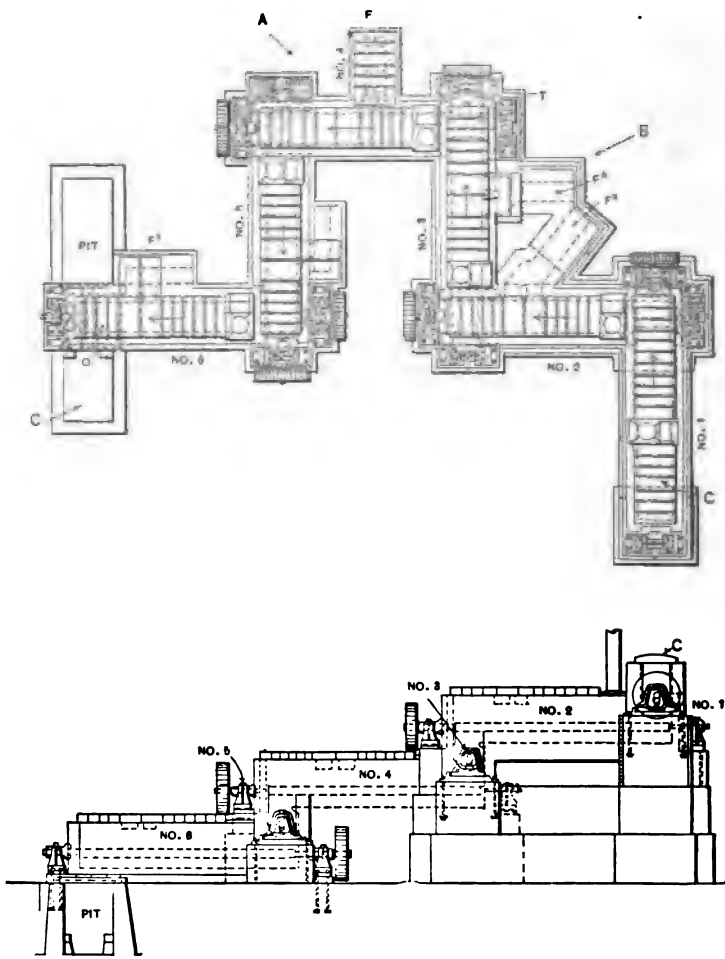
PLAN AND ELEVATION OF THE MIXERS.
